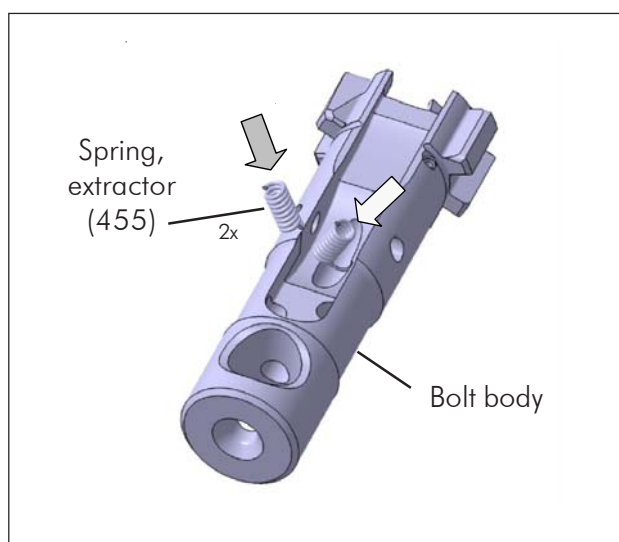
f - Reassembly of the springs, extractor (455)
